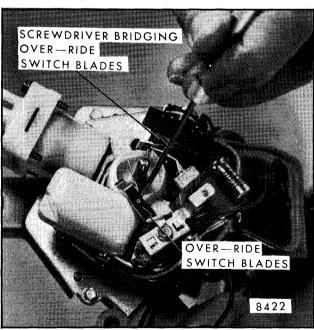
Condition 3 - Wiper Shuts Off Before Wash Cycle is Completed
